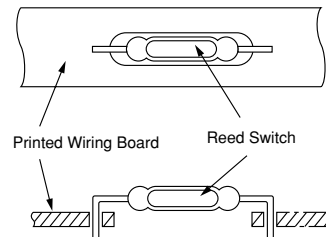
Example of mounting of reed switch on warped printed wiring board
